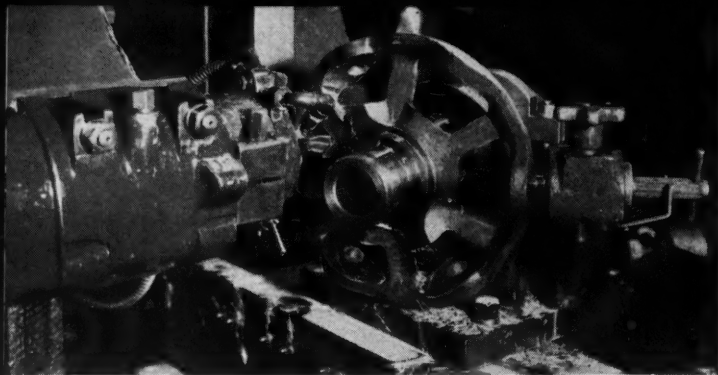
The spaces between the spokes of the propeller shaft are machined in this P. & W. Keller toolroom machine. The cutter is a spiral mill.
